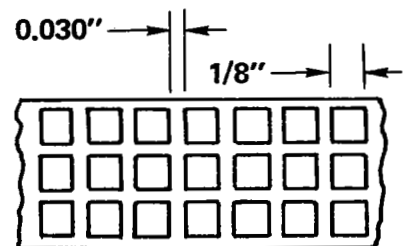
Interstage Honeycomb Seal Assembly.
